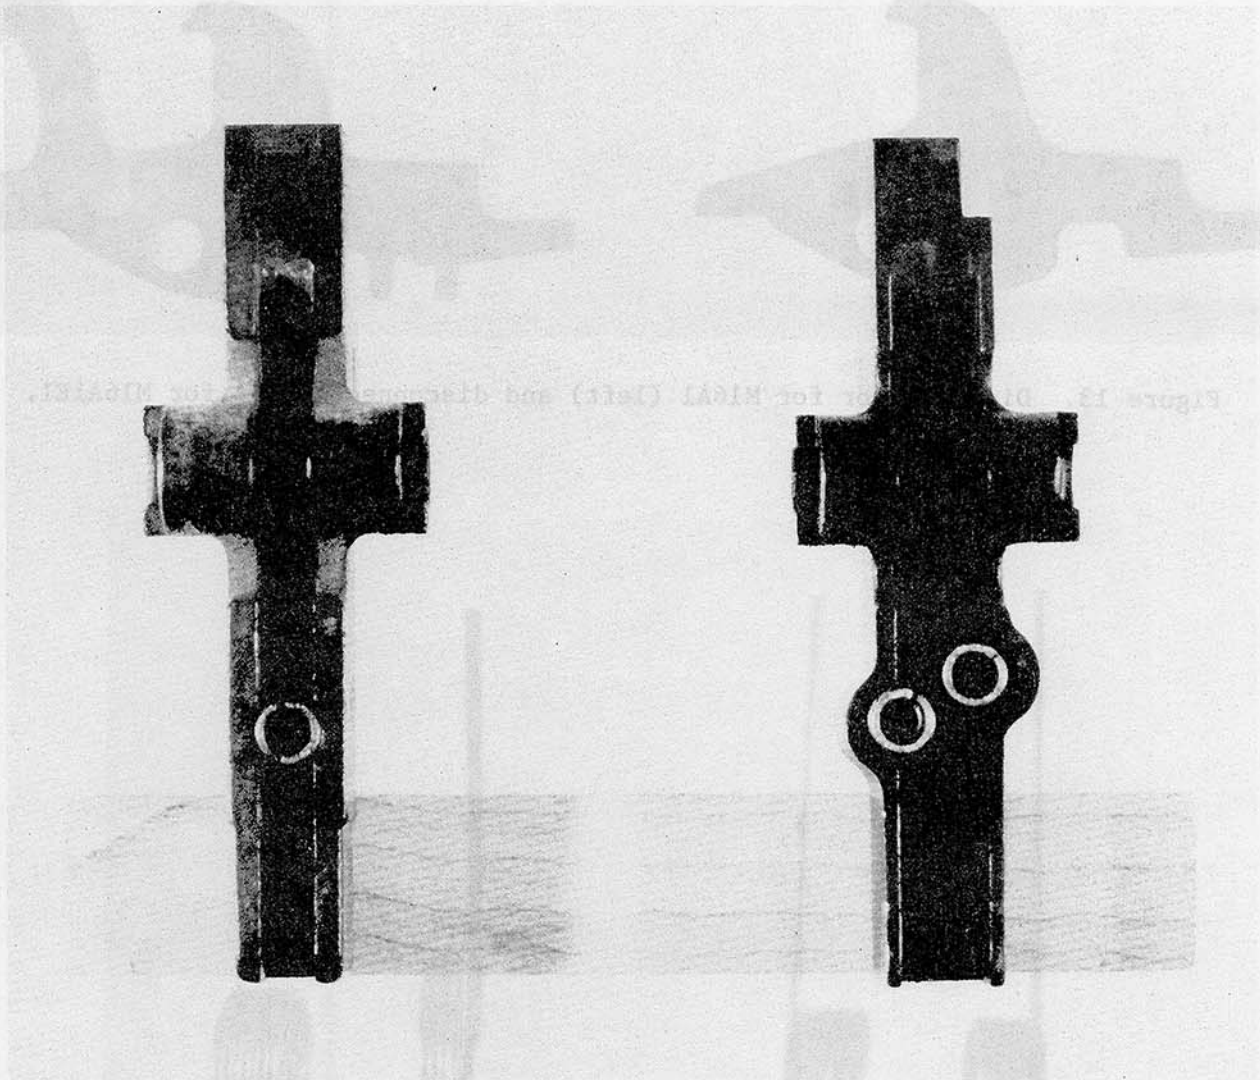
Top view of trigger assembly showing disconnecter springs and change in size between M16A1 (left) and M16A1E1.
